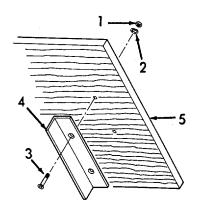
Clothing Sewing Machine Tray, Removal.
